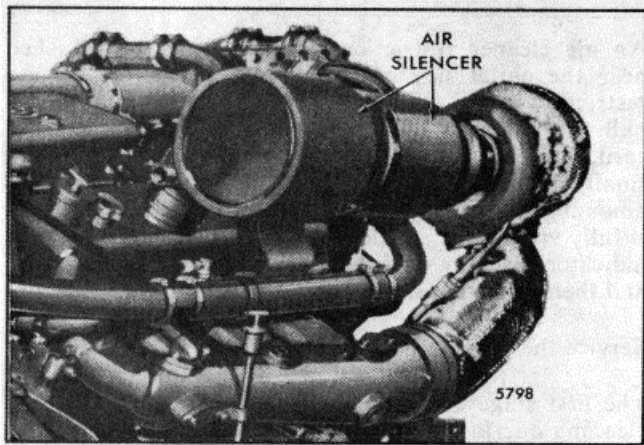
Air Silencer Mounted on 6V-92 TA Engine
